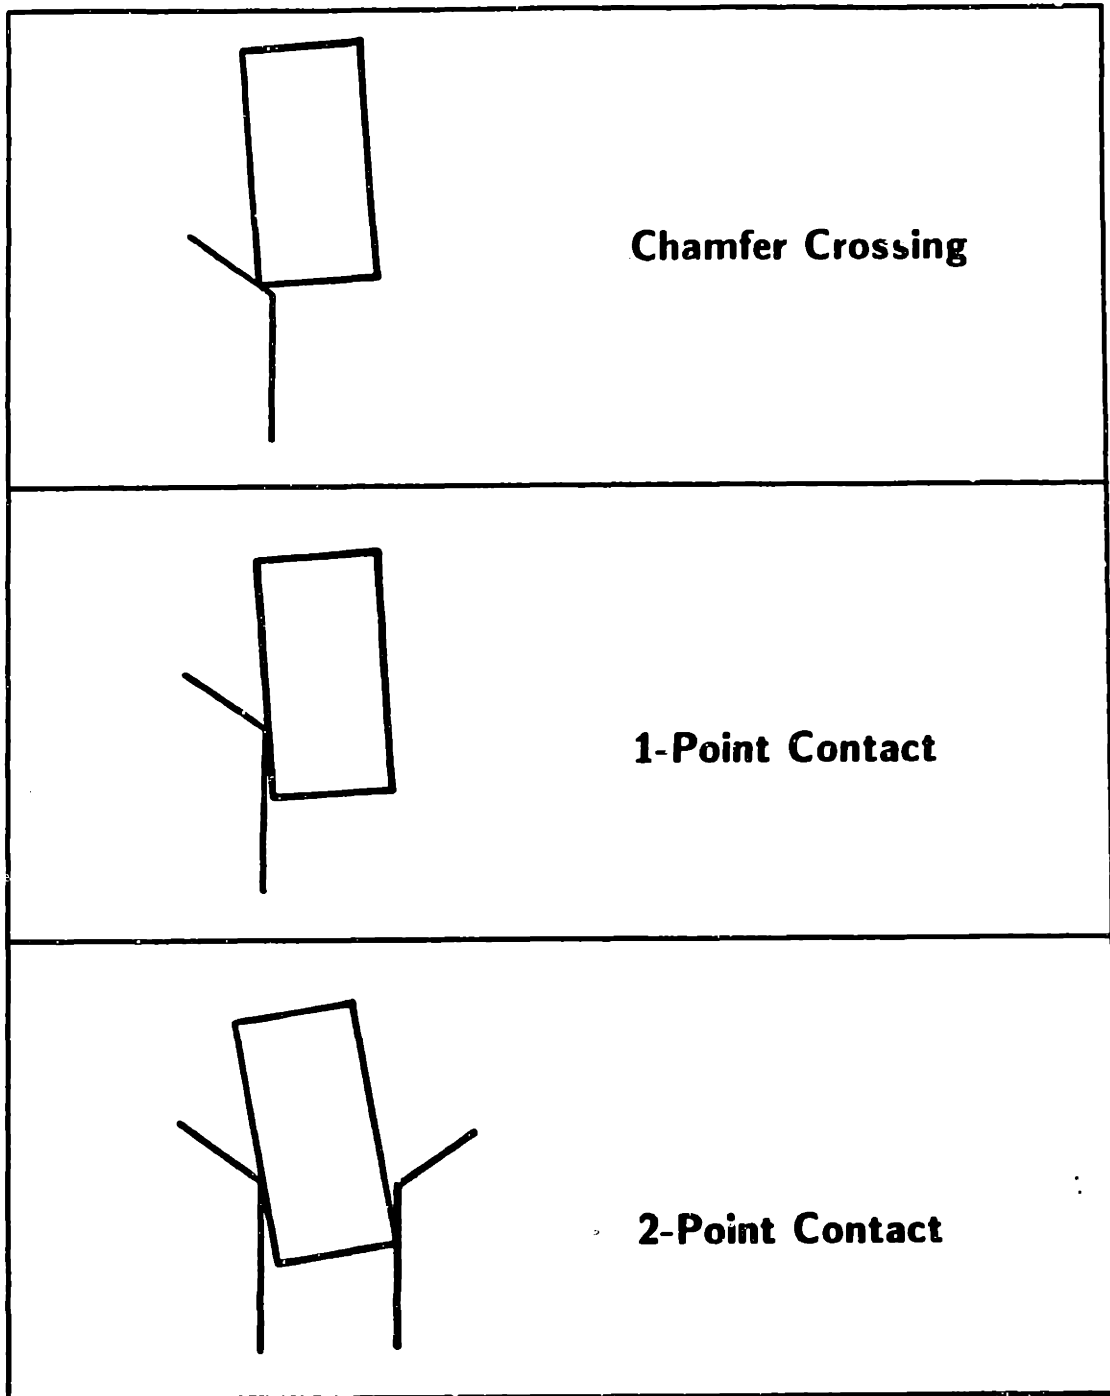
Ideal assembly phases for the two dimensional assembly of a peg and a hole.
